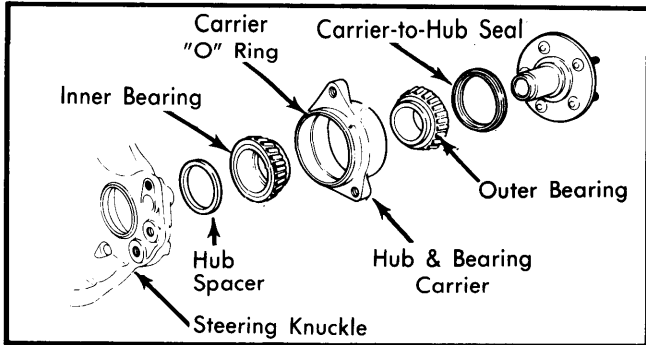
Exploded View of Eagle Axle Hub Assembly
